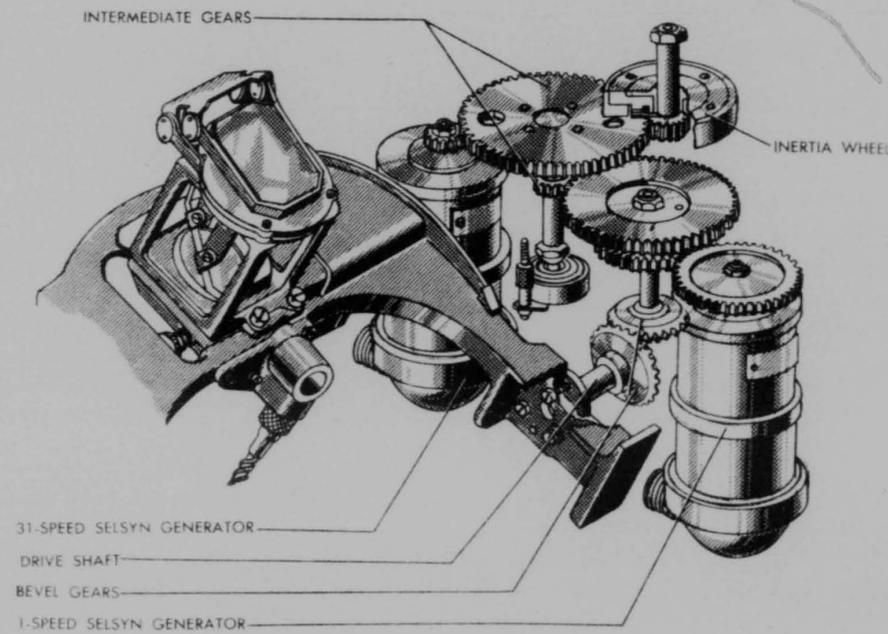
Elevation Selsyn Generator Assembly Gearing.
